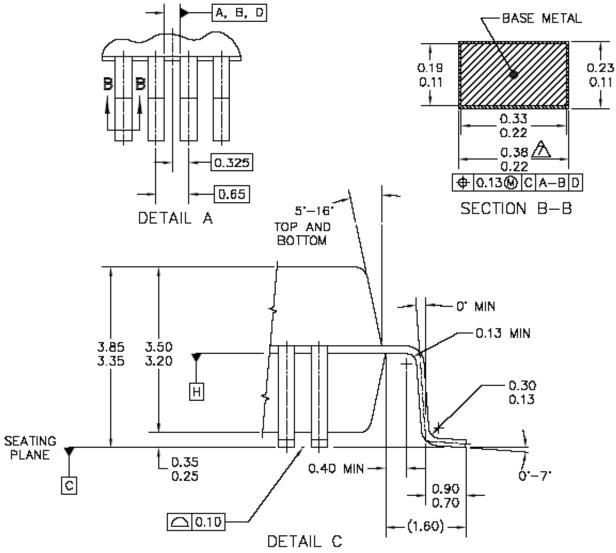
160QFP Package Dimensions (Sheet 1 of 2)
